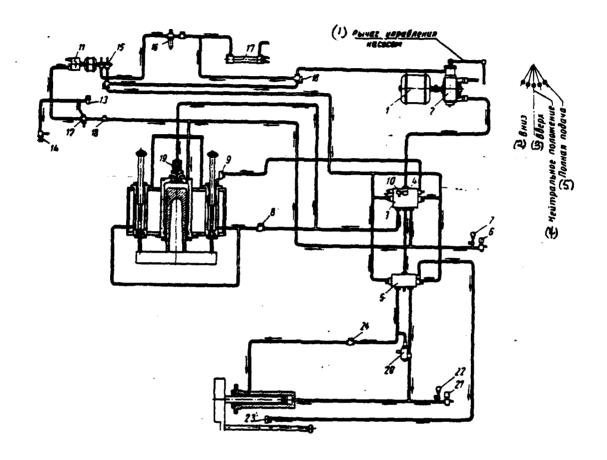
The hydraulic schematic of punch press by effort/force 500 t: 1 - electric motor with the power of 110 kW; 2 - rotational-plunger pump with the supply 370 1/min; 3 - slide-valve distributor; 4 - check valve; 5 - slide-valve distributor of horizontal cylinder; 6 - pressure relay; 7 - manometer; 8 - check valves; 9 - hydraulic terminal switch; 10 - safety valve; 11 - booster pump with the supply 2 1/min and with the electric motor with
